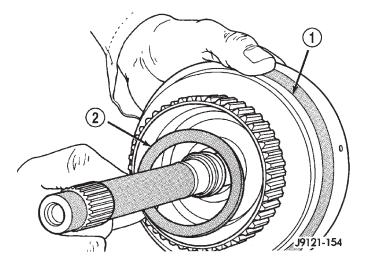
Installing Rear Clutch Thrust Washer 1 – REAR CLUTCH RETAINER 2 – REAR CLUTCH THRUST WASHER (FIBER)
